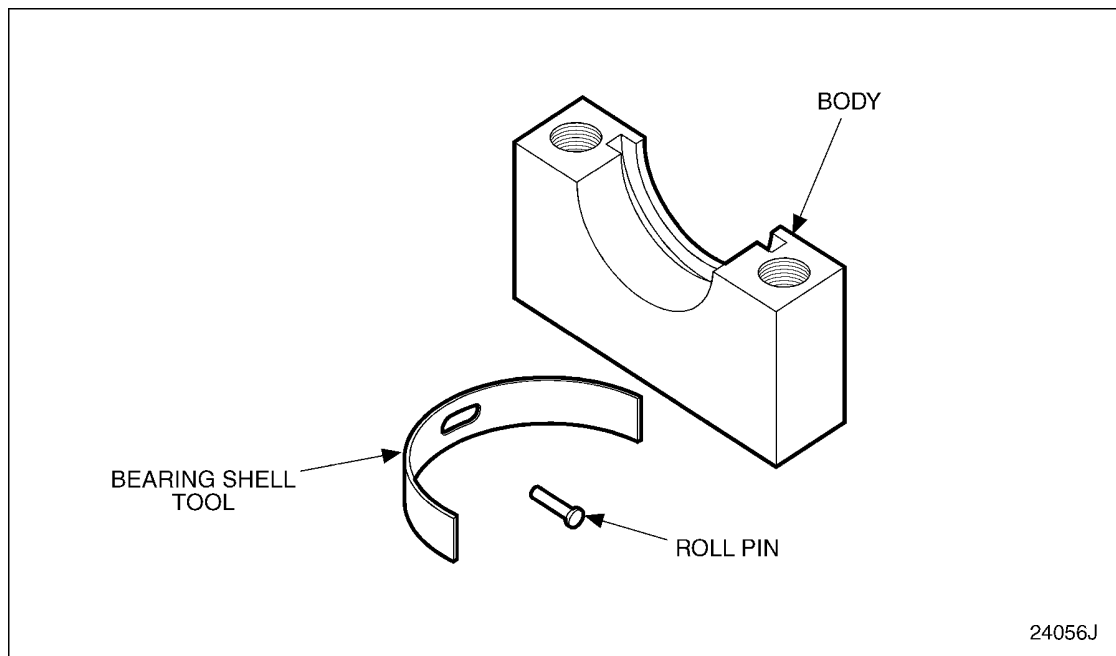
Main Bearing Shell Remover and Installer Tool Set
